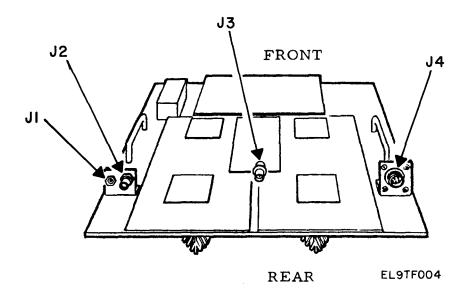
Upper 5018 Chassis Plate Showing Internal Cable Connectors (2A1).
